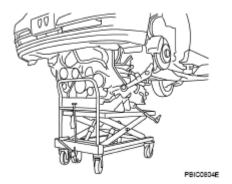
Supporting Bottom Of Suspension Member And Transmission Assembly Courtesy of NISSAN MOTOR CO., U.S.A.
